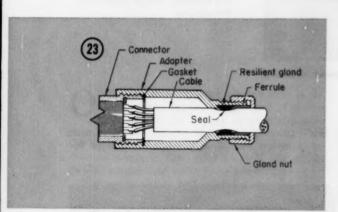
Cable gland seal for waterproofing single-jacketed cables.
